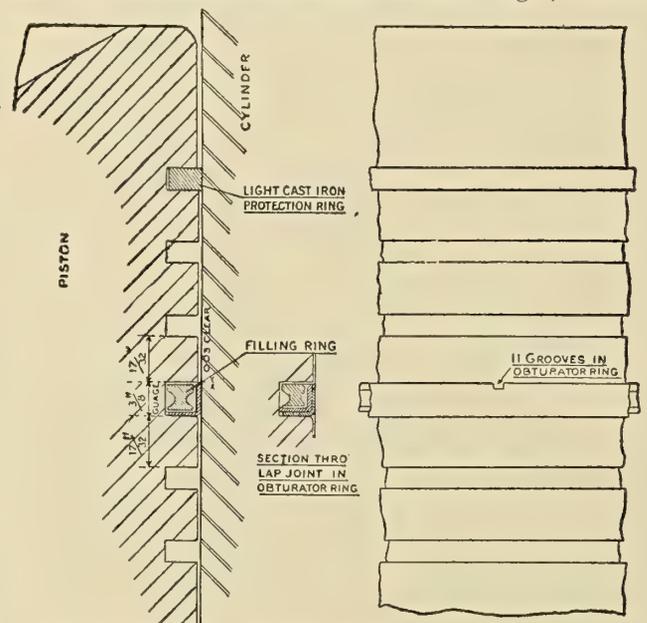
Unit Engine. Arrangement of Obturator Rings in Piston
